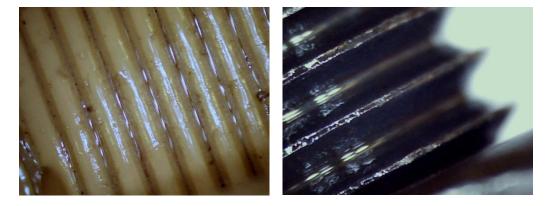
Bolt thread and removed coating show good levels of inhibiting oil
